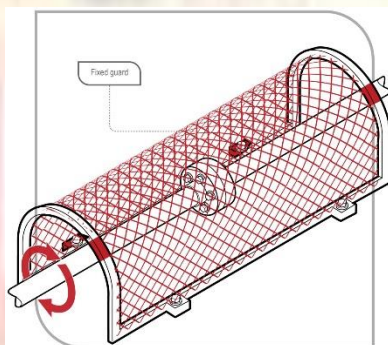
FIXED GUARD ON ROTATING SHAFT OR COUPLING
